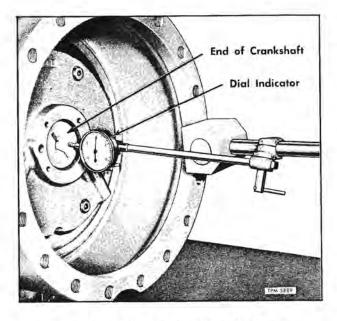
Checking Crankshaft End Play Using Dial Indicator
